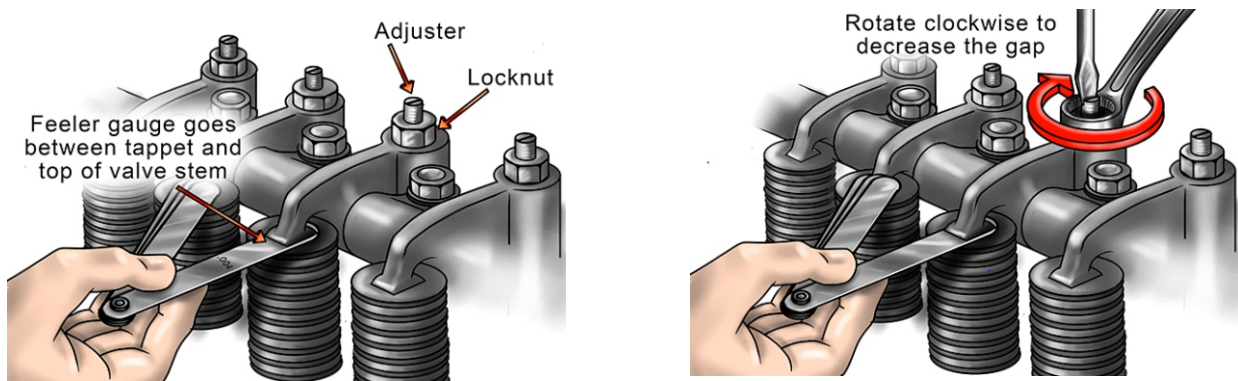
Process of Adjusting Tappet Clearance
